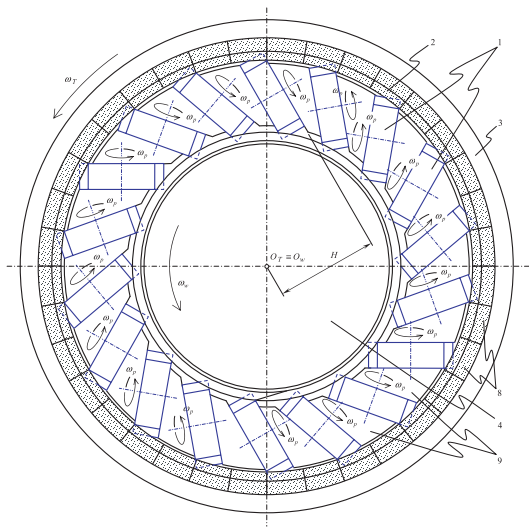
To the concept of a method and apparatus for finishing modified pinion with conical gear finishing tool, and with the conical driving worm.
